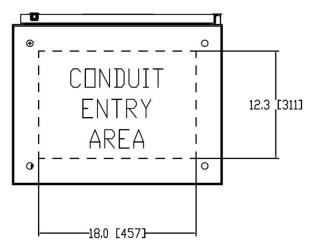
Top Dimensions, no Customer I/O Panel (Enclosed)
